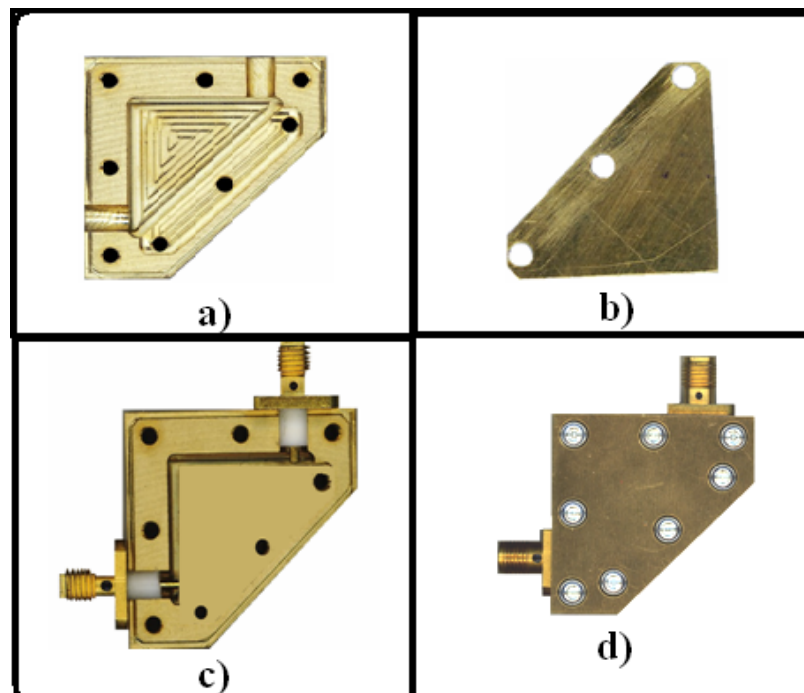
A fabricated single triangular FWG resonator before assembly (a, b and c) and after assembly (d).
